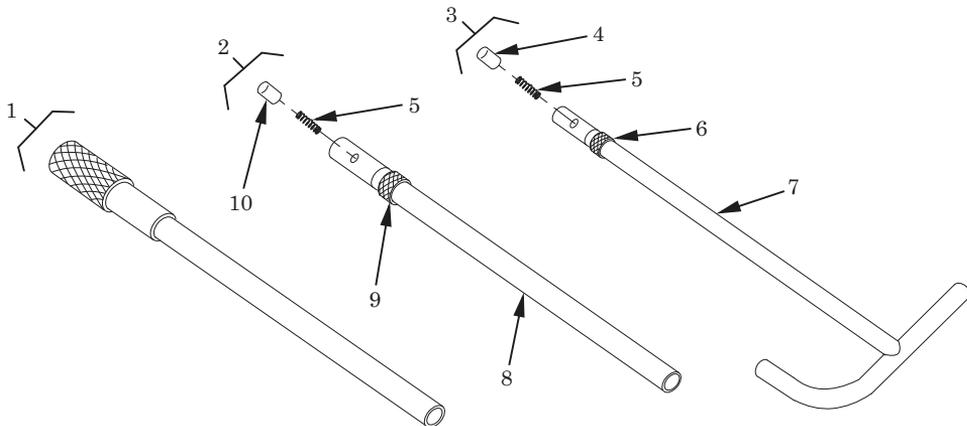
Assembly of Artillery Cleaning Staff Assembly Sections.
